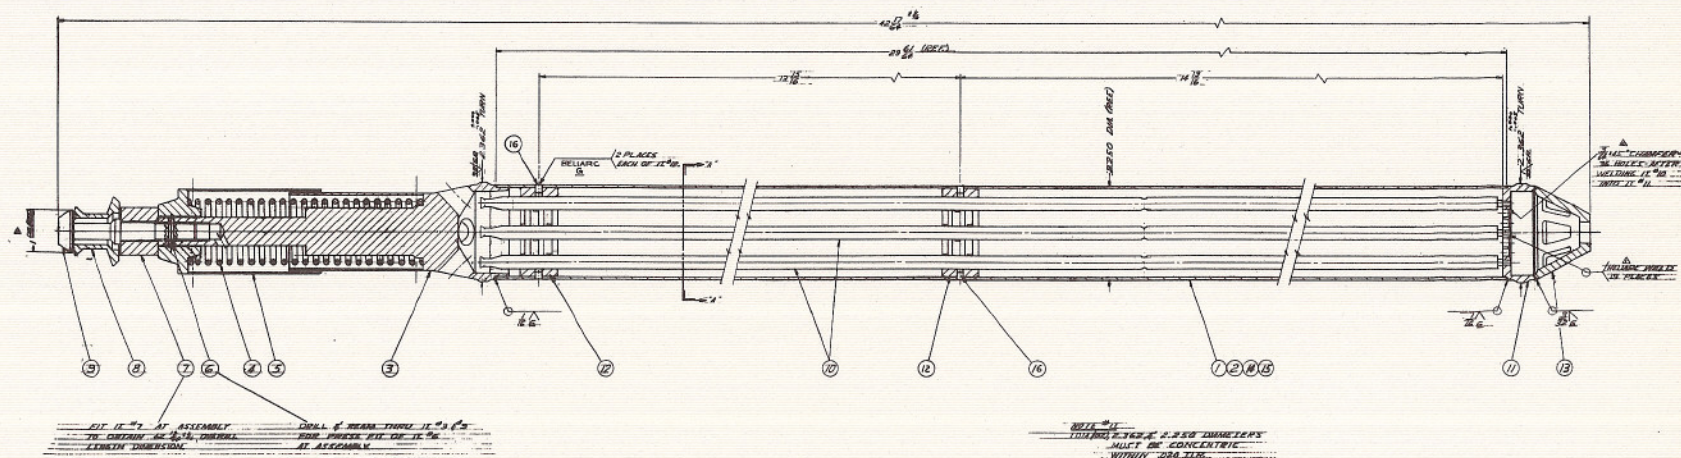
Operating control rod. Code: 2) outer shell; 3) delatching spring lower housing assembly; 4) delatching spring; 5) delatching spring upper housing assembly; 9) pin head; 10) poison rod assembly; 11) poison rod support grid; 12) tube sheet assembly; 13) inlet nozzle. (A-C Dwg. 43-500-813).
